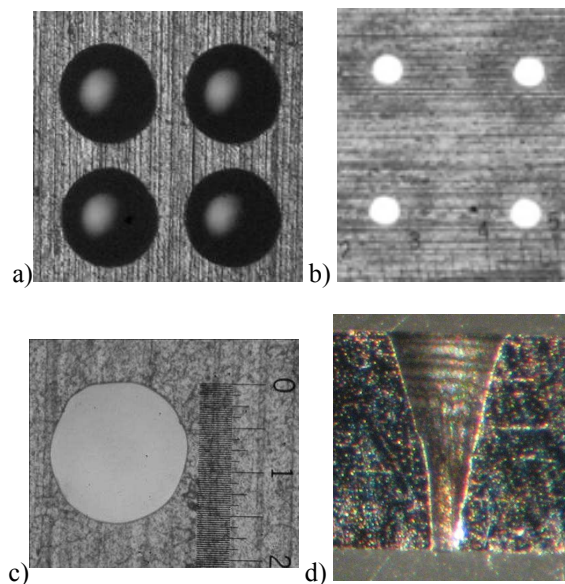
Nozzle shaped cut with a 75 micron outlet. (a) inlet surface (b) outlet surface (c) magnified view of a single outlet, scale 0-1=50microns and (d) is a cross sectioned view of the nozzle shape
